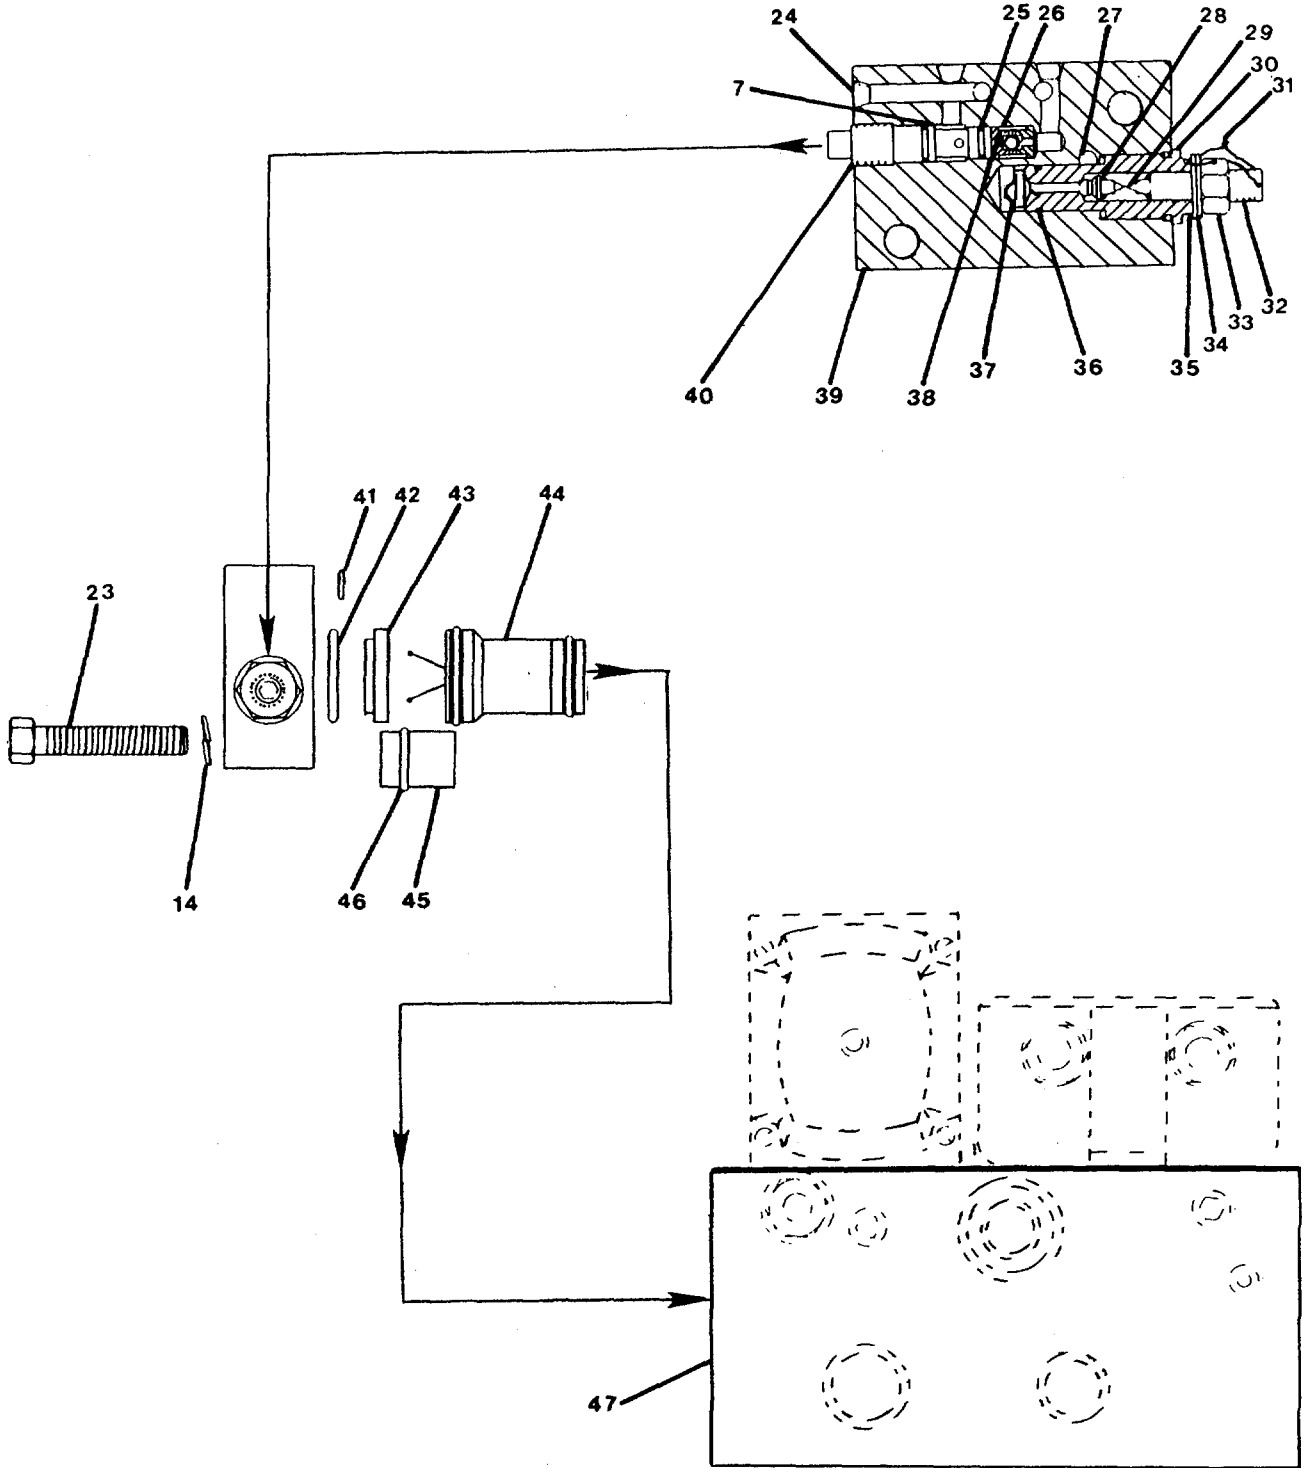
Uniblock 2A Assembly (Sheet 3 of 3).
